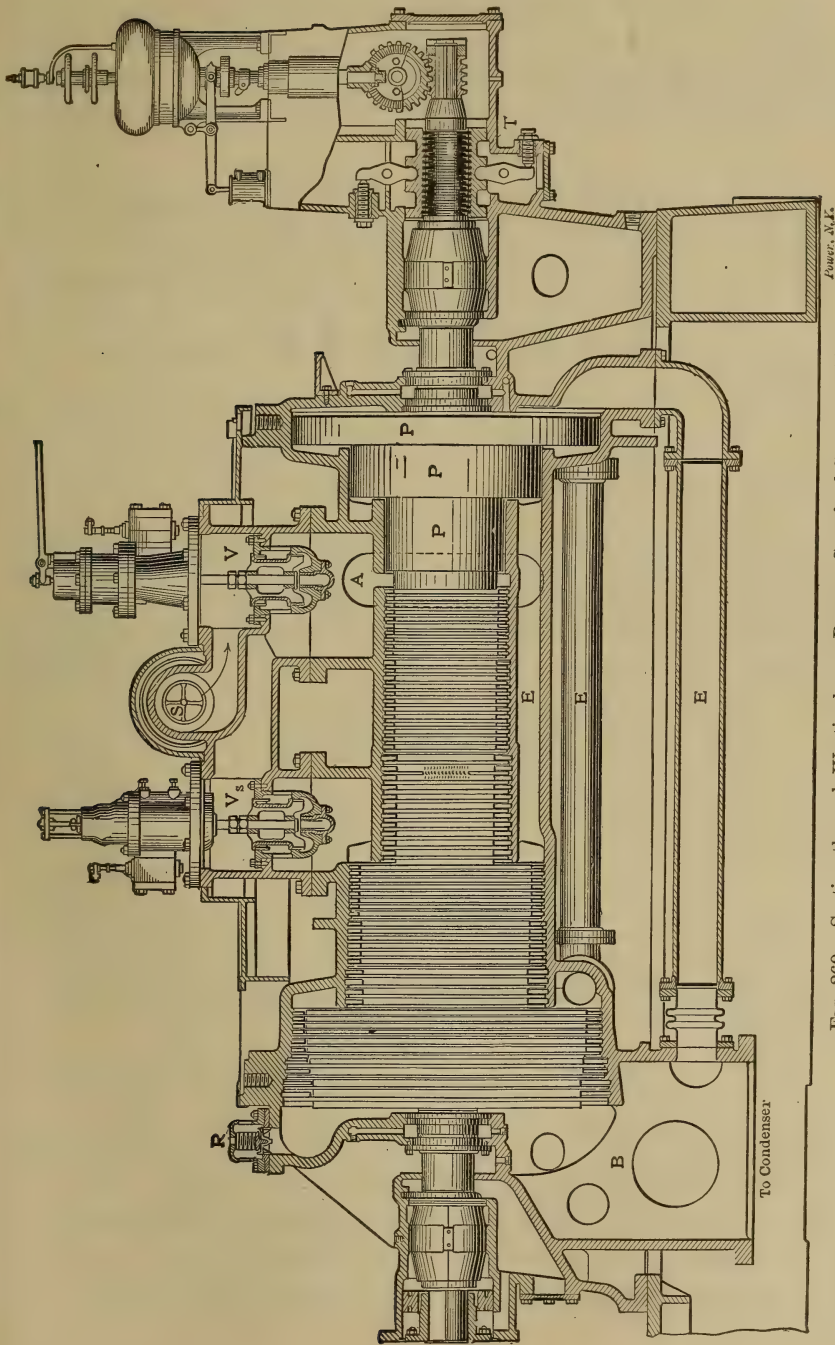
Section through Westinghouse-Parsons Standard Steam Turbine.
